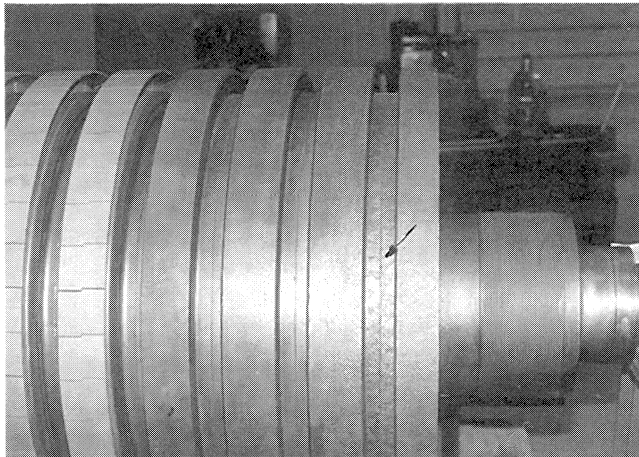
Standby Corrosion on Rotor of a Peaking Gas Turbine.
